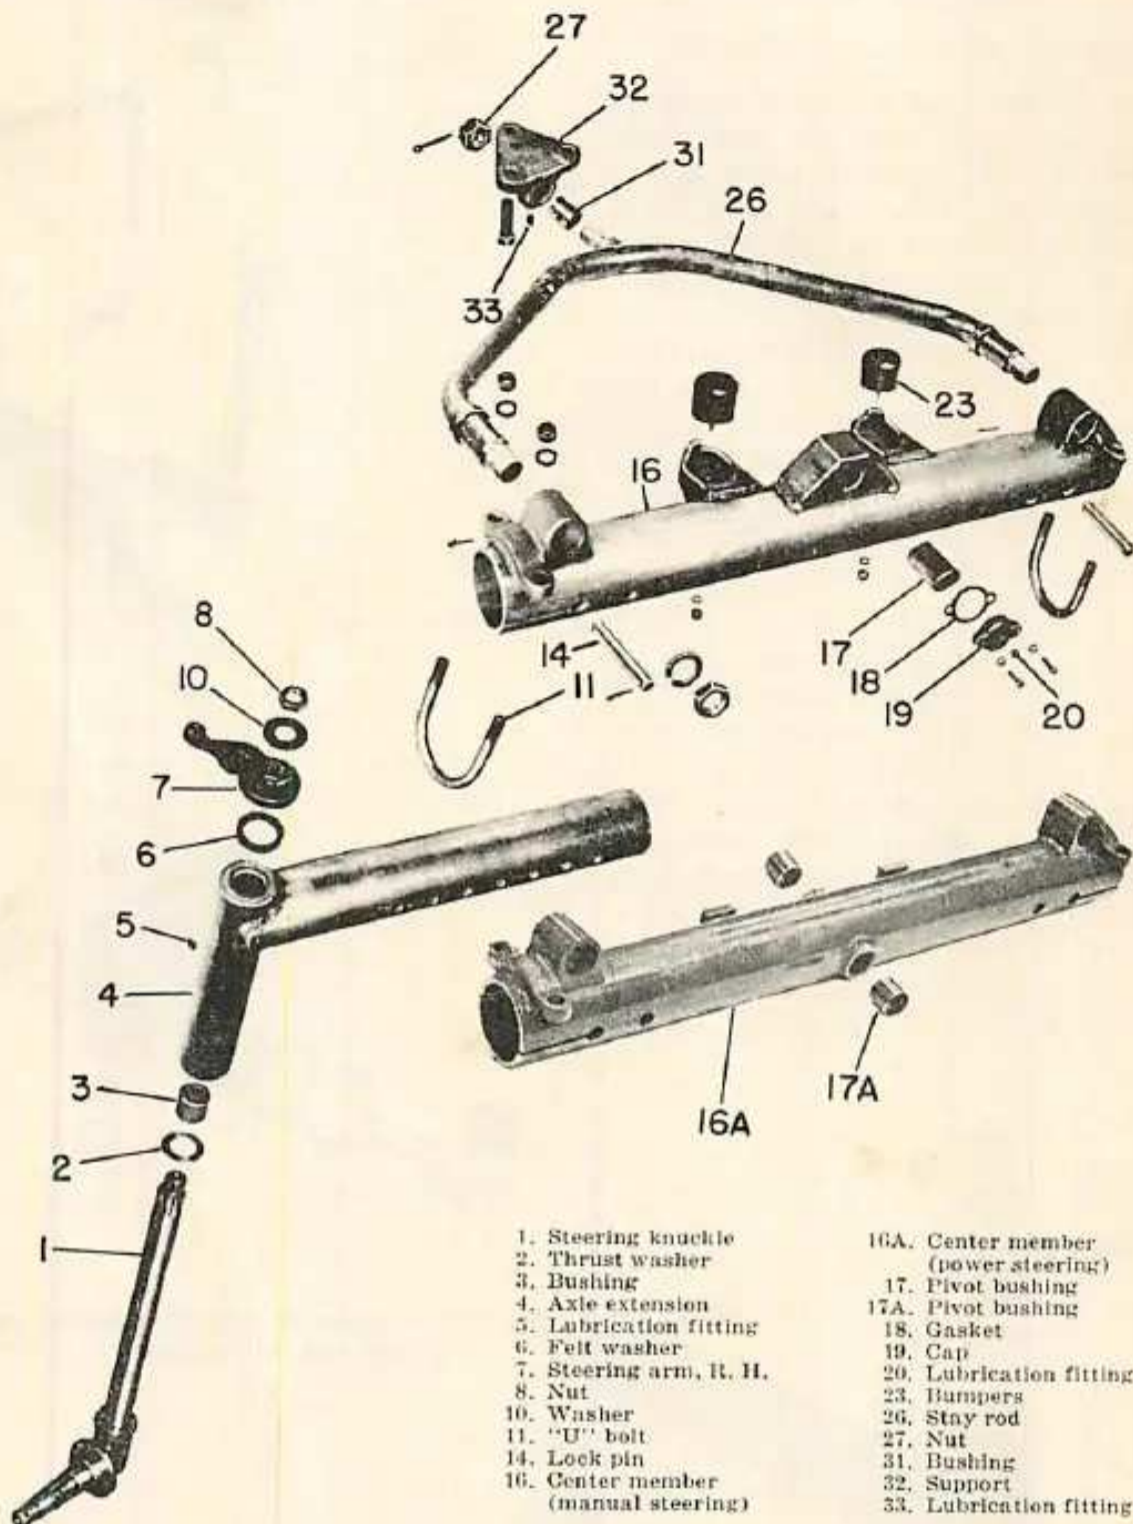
Exploded view of Rowcrop adjustable front axle assembly. Models equipped with manual steering use center (main) member (16); those equipped with power steering use center member (16A). Narrow tread power steering models use center member similar to (16A), but shorter than standard part.
